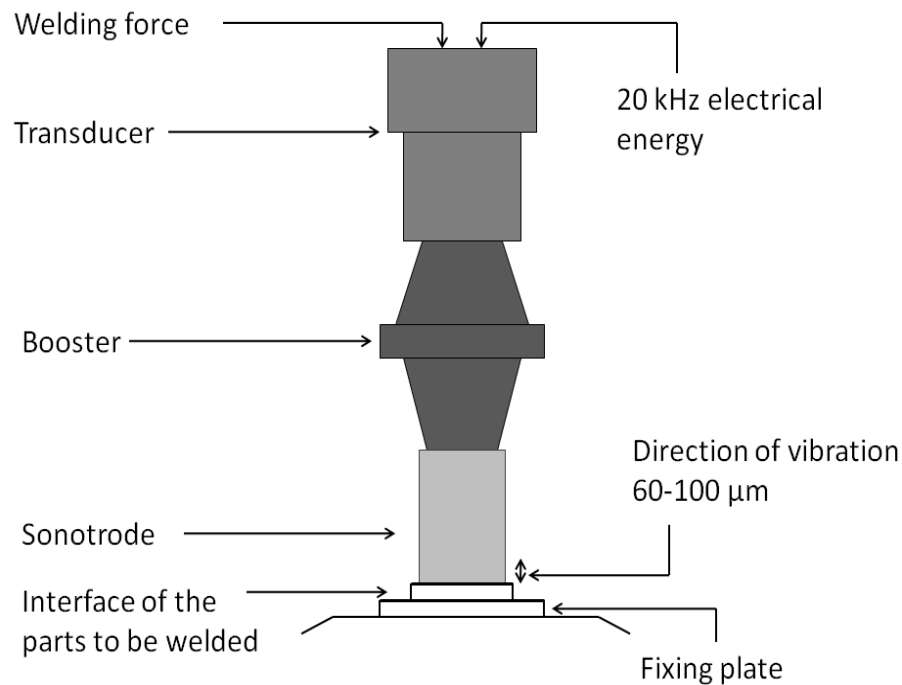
Schematic drawing of an ultrasonic welding machine
